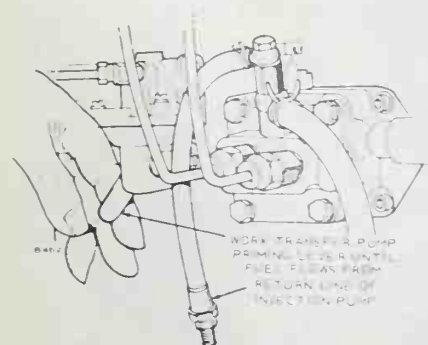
View showing bleeding air on Model DJE equipped with Bryce or Kiki injection pump.
